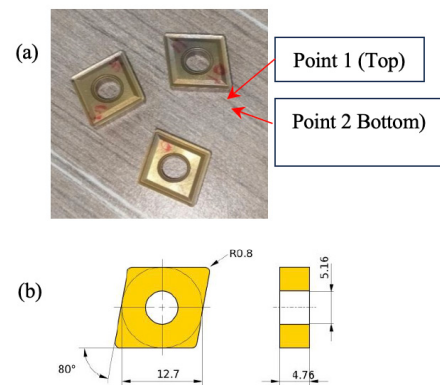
(a) Carbide Cutting Tool and (b) Specification of CNMG120408
